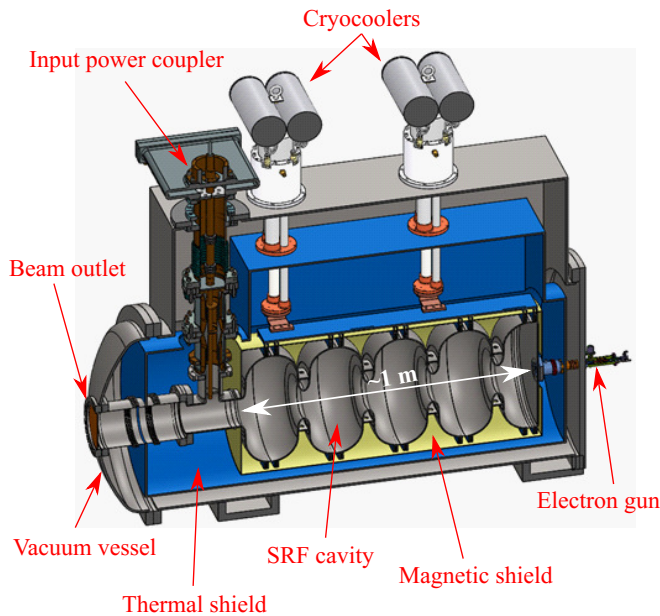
CAD rendering of a compact, meter-long e-beam accelerator showing the components.
